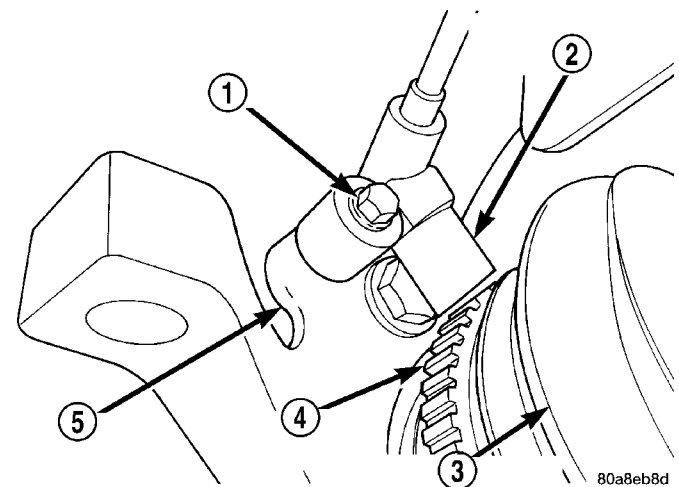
Front Wheel Speed Sensor Attaching Bolt
